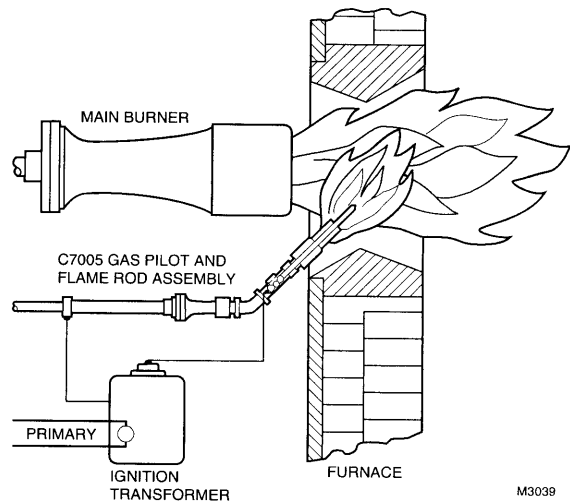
Typical mounting of gas pilot and flame rod assembly on inspirating (Venture type) gas burner.
